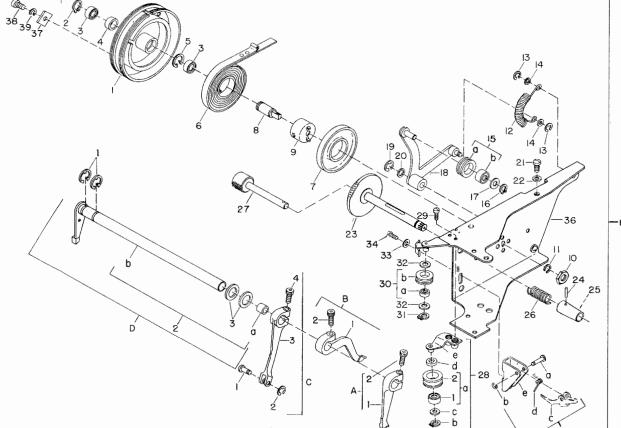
Takeup Drum And Linkage Assembly SL-4-03315 Figure 15
